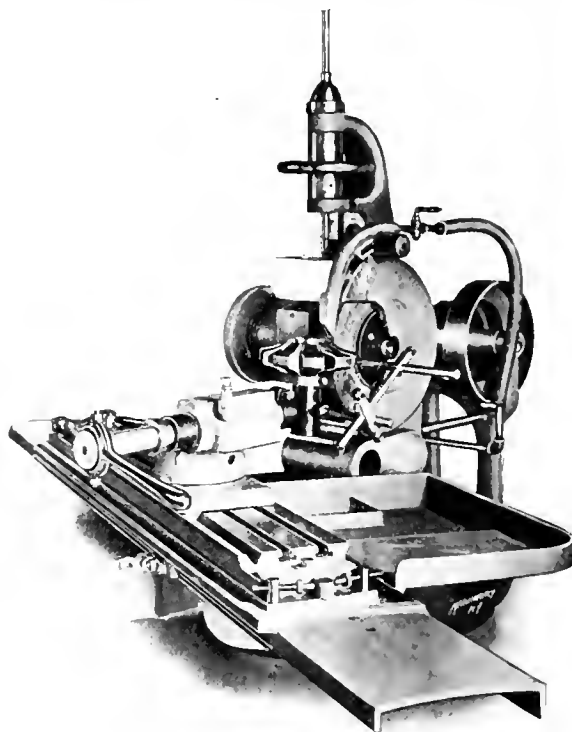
Universal Holder Engaged in Grinding a Large Gear Cutter.
